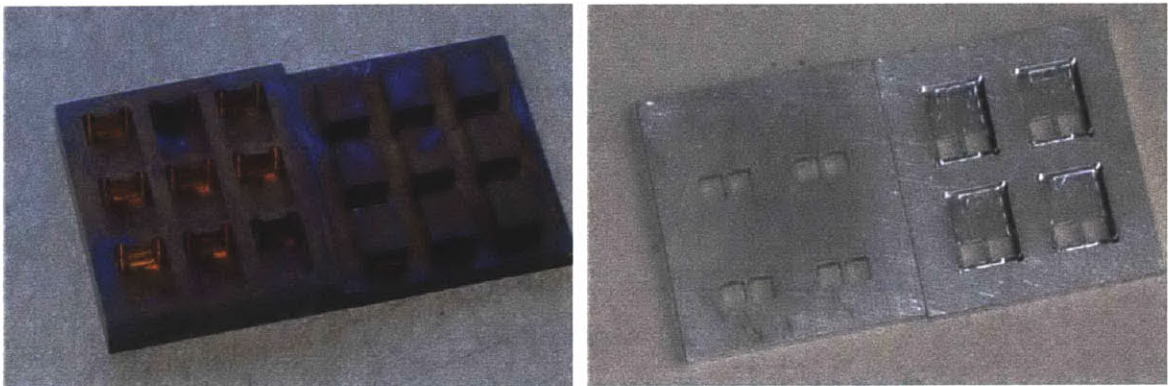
Machined Bonding Chuck and Shadow Mask
